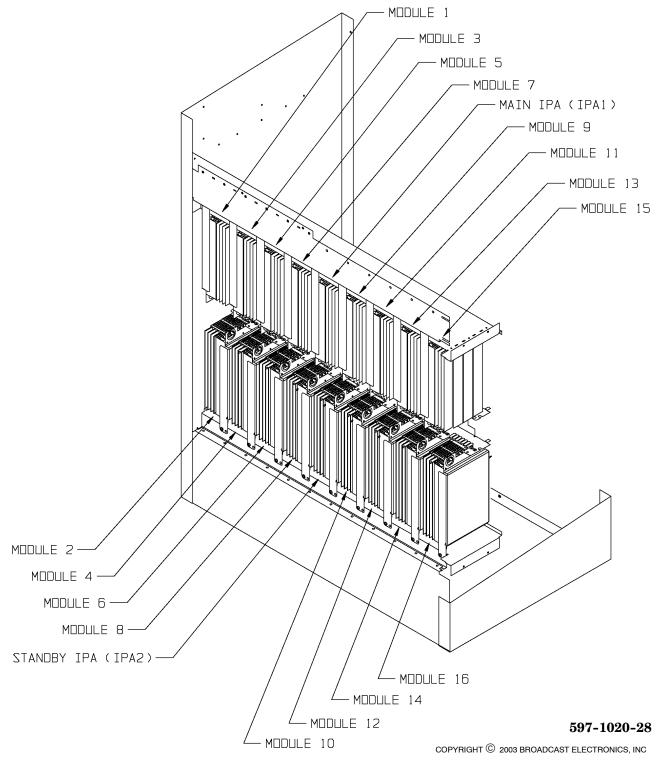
FM-20S/FMi 1405 COMPONENT LOCATOR (SHEET 3 OF 11)
